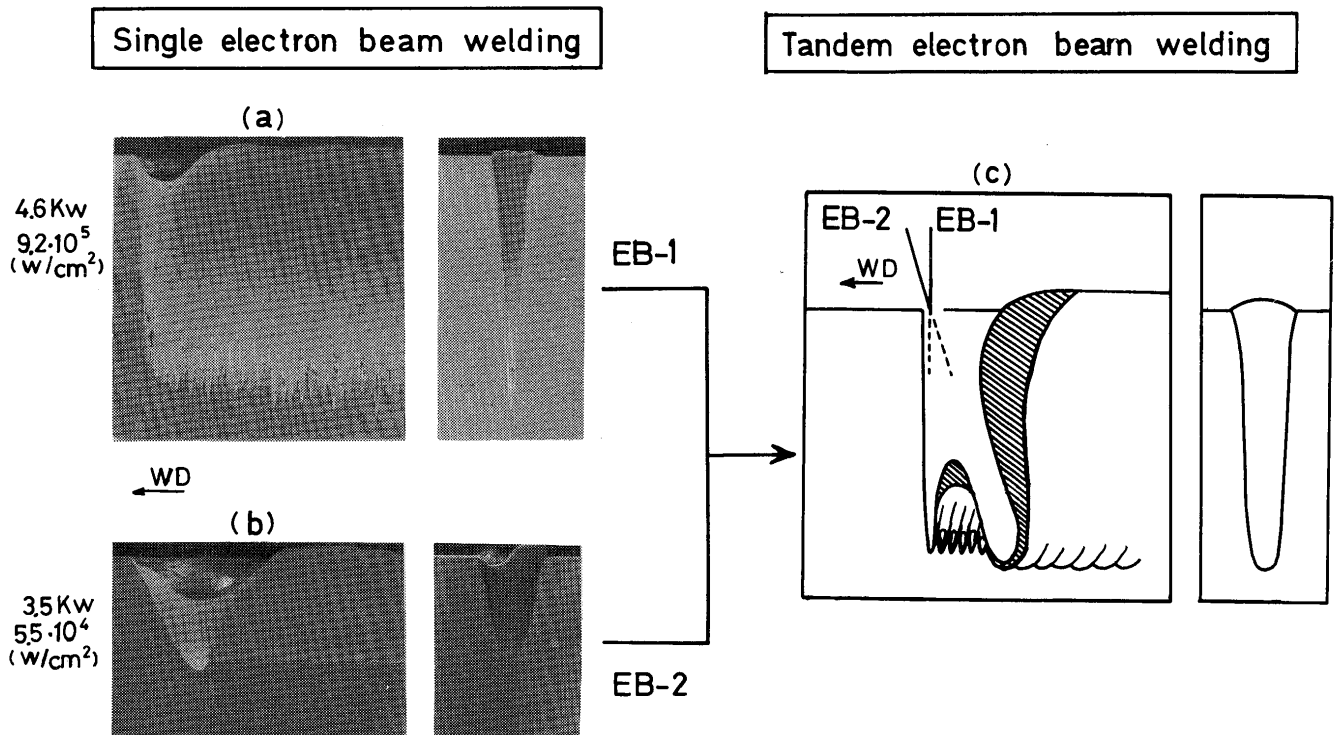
Principle of preventing internal defects by TEB-Welding
